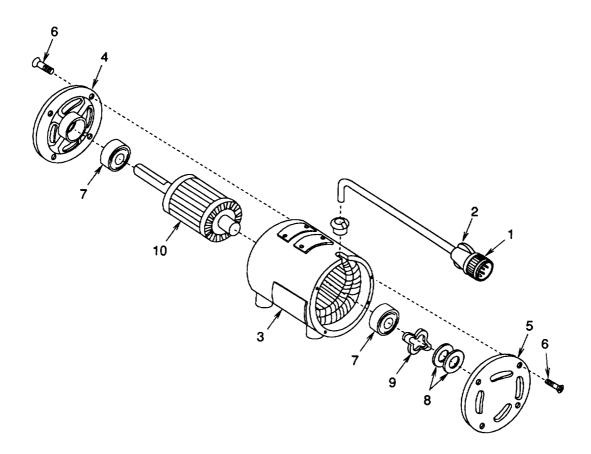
Condenser Fan Motor Assembly, Welco Model M-4720-50
